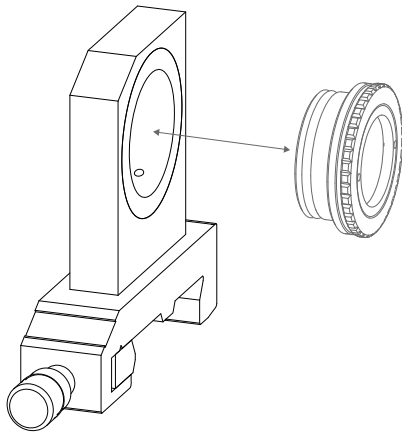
MM-0020 Mounting plates C25 and C30 on carrier MG20
